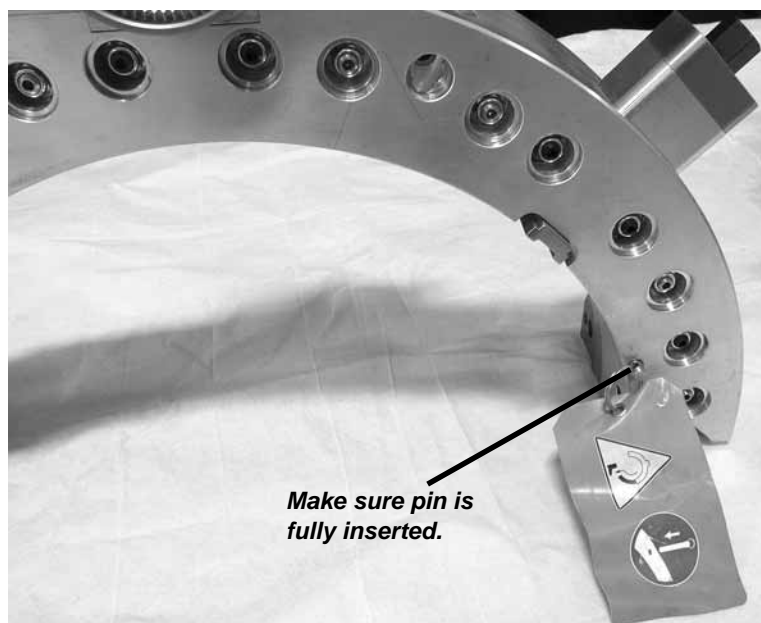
Always have the alignment pins inserted when lifting or handling a split machine.
